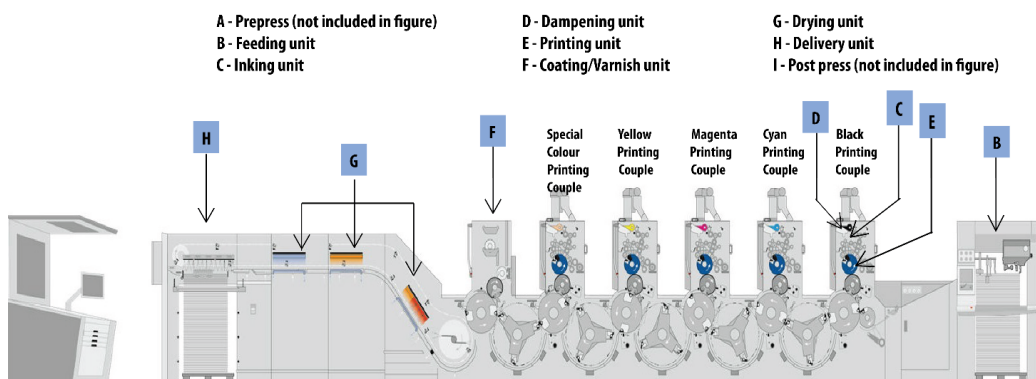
Four colour sheetfed offset printing machine with special colour couple
